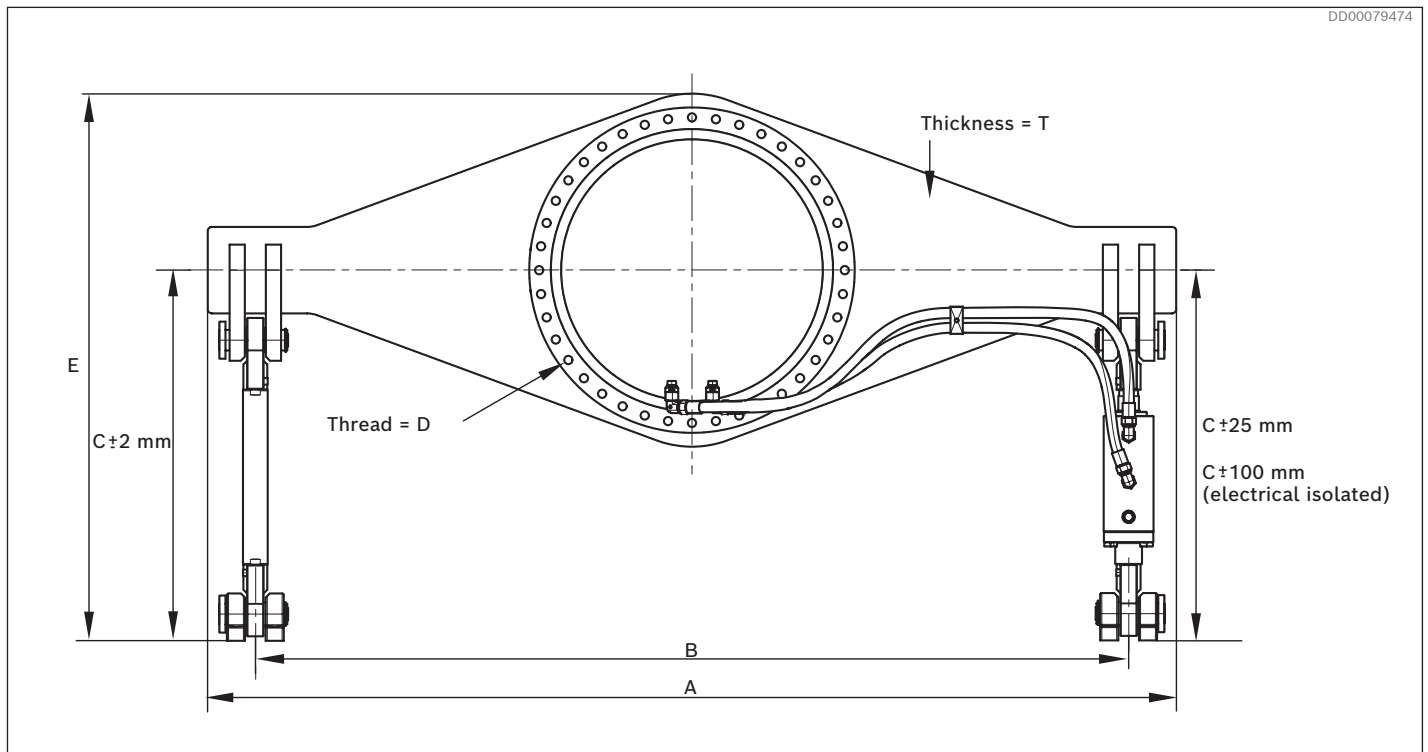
Dimensions double ended torque arm DTCA, DTCB, DTCBM
